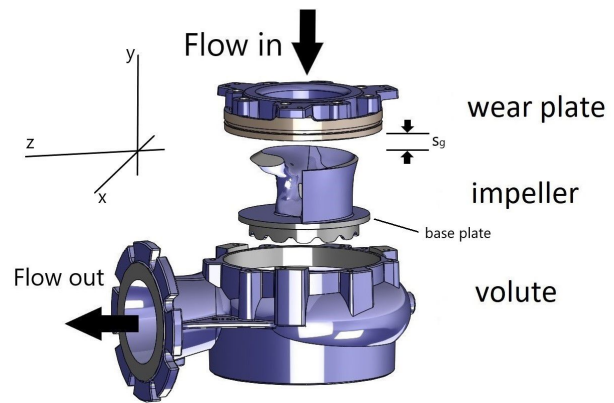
The axial gap, s_g , and the impeller base plate are indicated.
